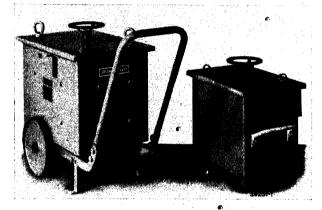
Welding transformer with smooth welding-current regulation, for 25—135 and 50—220 A.
